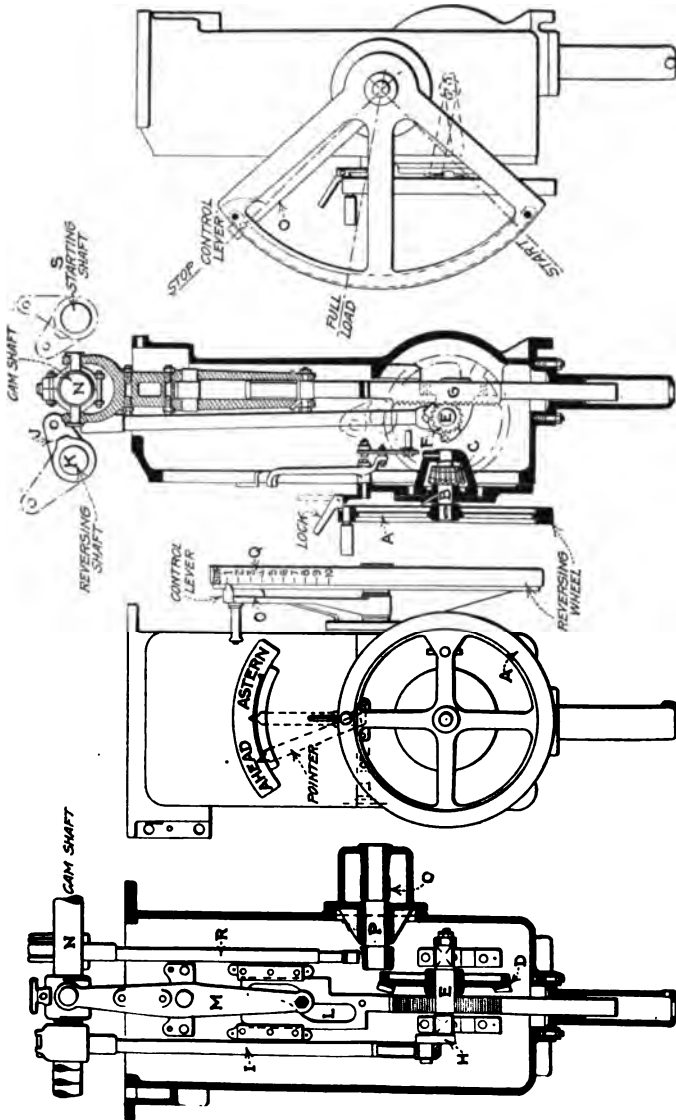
McIntosh & Seymour marine Diesel reversing apparatus.
